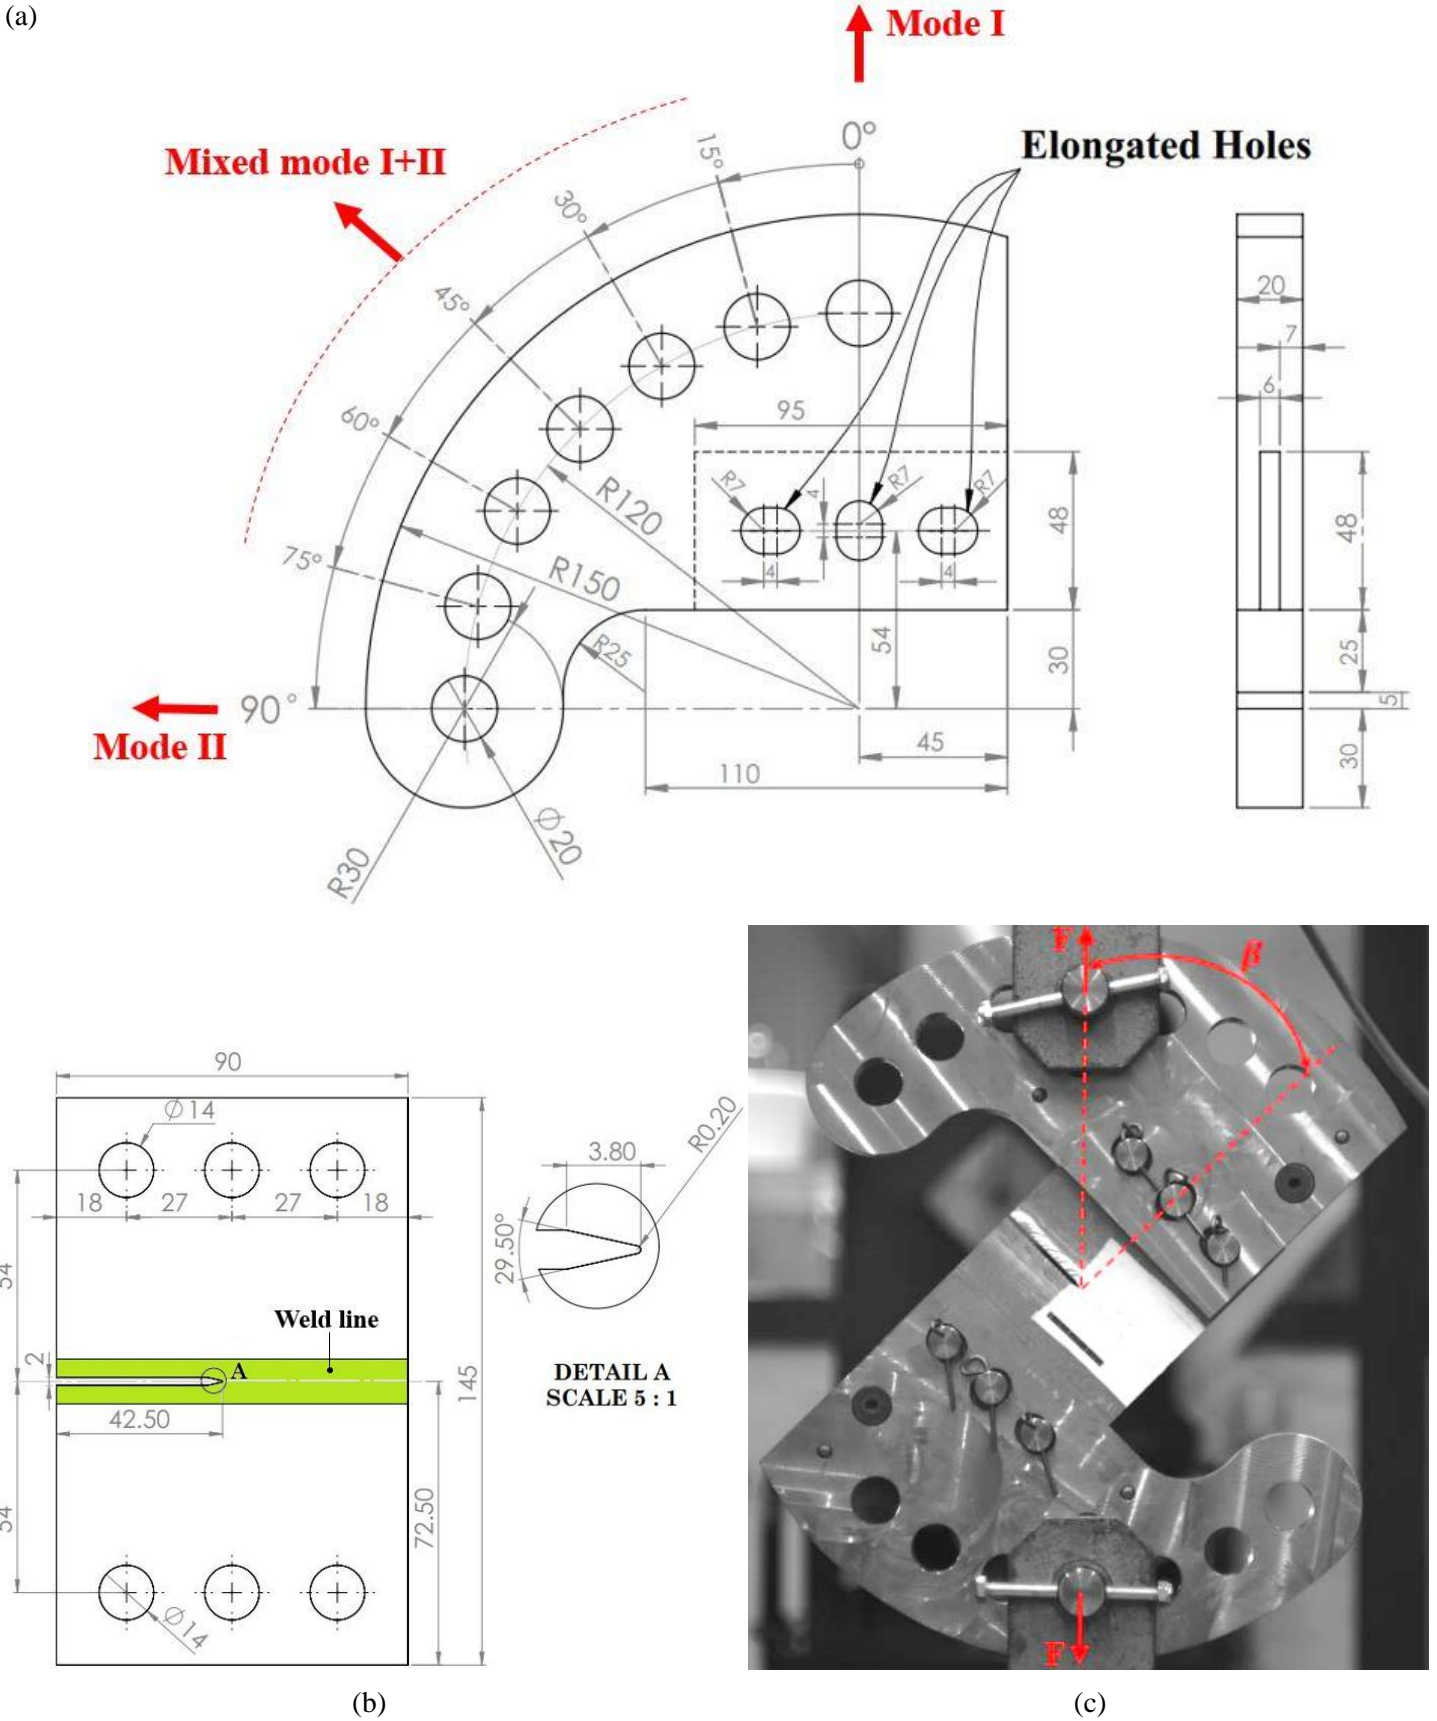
Drawing of the (a) fixture and (b) CTS specimen, dimensions are in mm. (c) mixed mode fixture.
